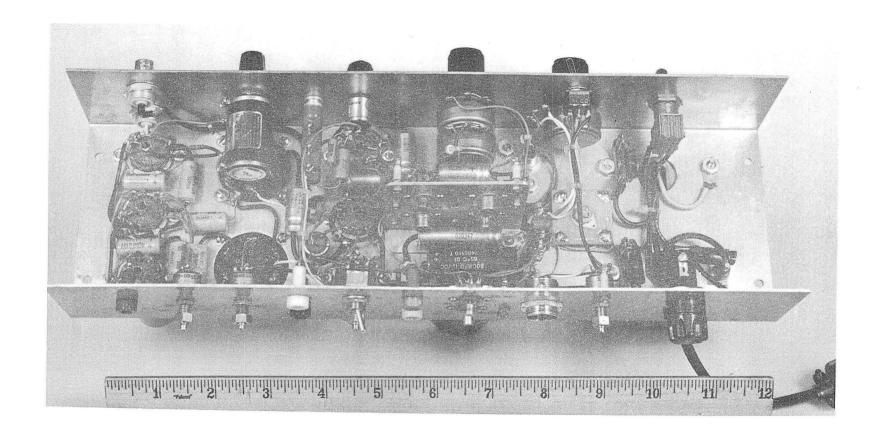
Bottom rear view of af unit showing components and wiring in detail (bottom cover plate removed). Most phase-shifting circuitry is mounted on the small plate in the center (template in Appendix I. E); transistors Q1 through Q4 are clearly visible.
